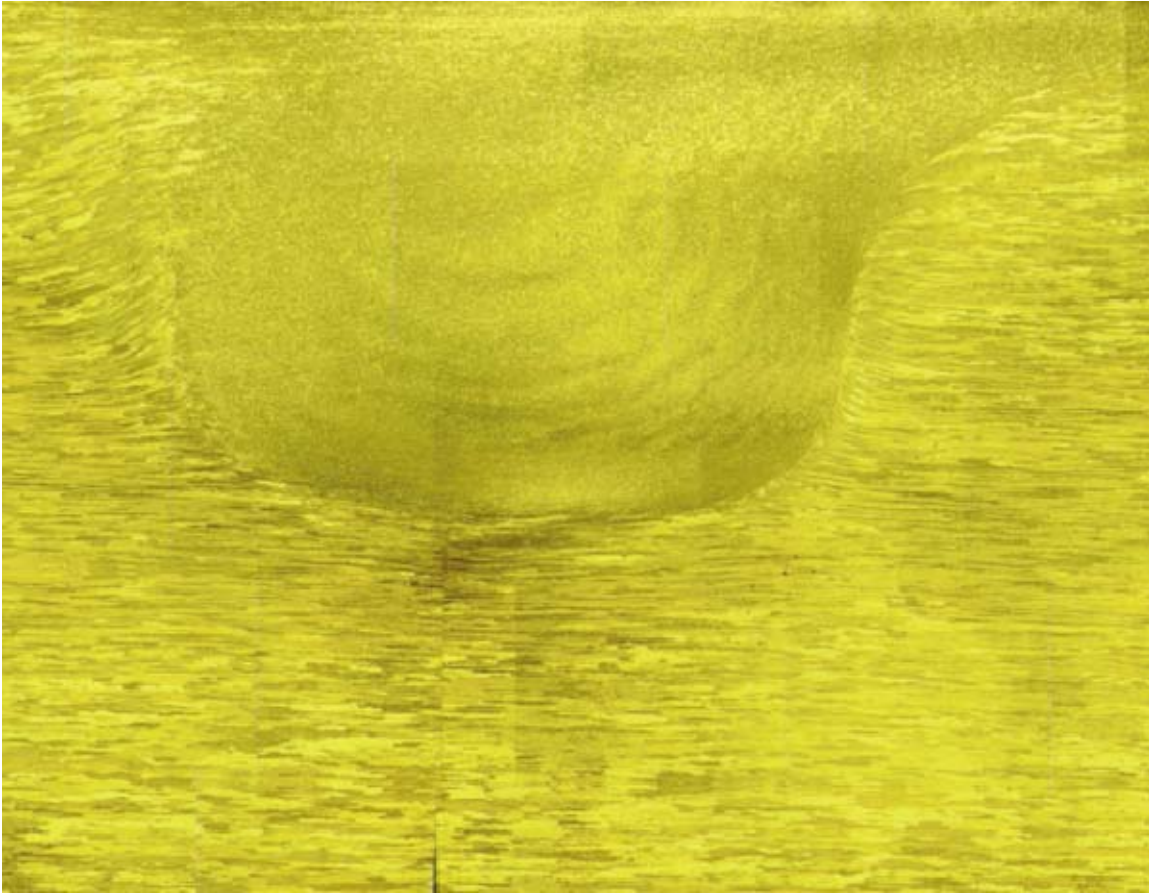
Transverse View of unanodized to unanodized, centerline weld location with a standard tool. (sample 1108)
